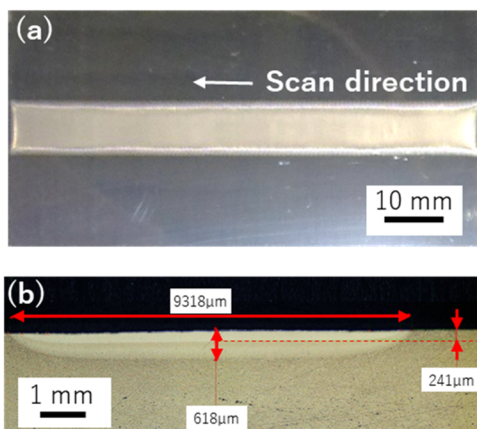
(a) Photograph of the surface of a stainless steel specimen sheet after the laser thermal processing, and (b) photograph of the cross section of a specimen near the laser irradiation area.
